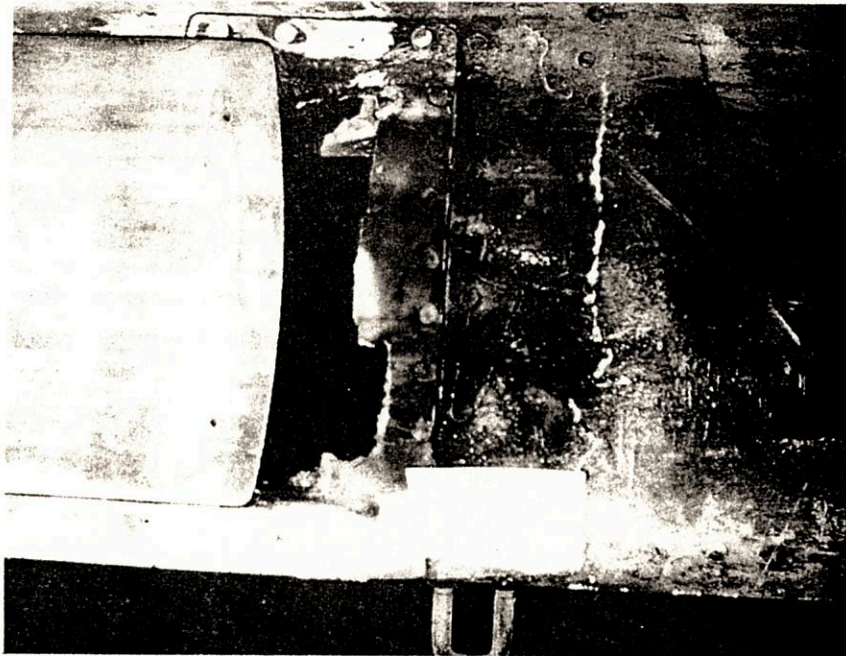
DAMAGED DRAIN VENT, LOUVERS AND SKIN, EXTERNAL VIEW
